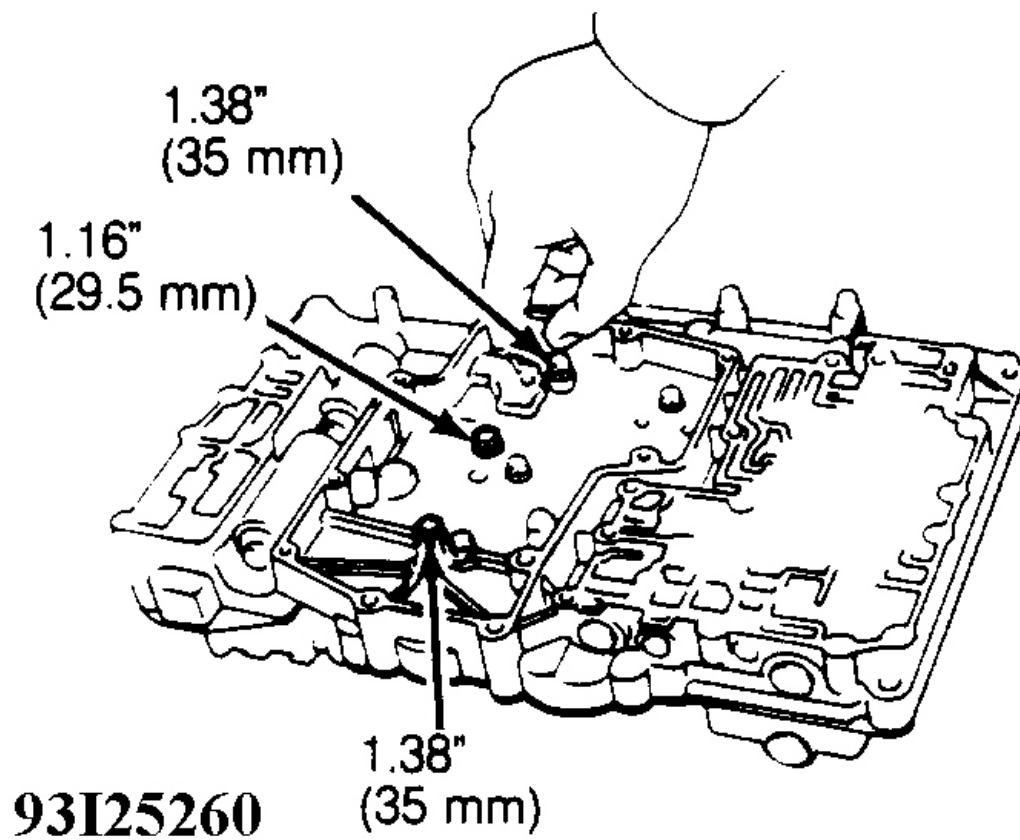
Locating Valve Body Bolts (2 Of 3)
